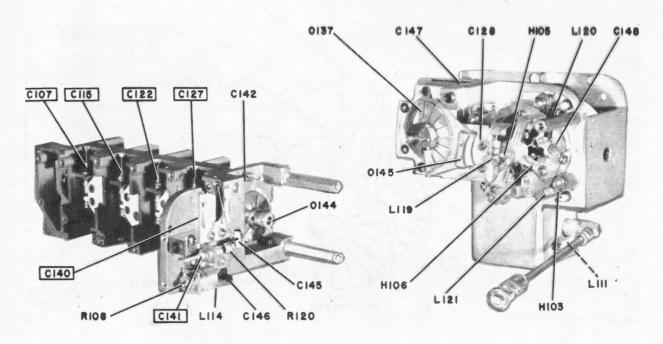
RF and PA Amplifier Assembly, Power Amplifier Stage Removed
